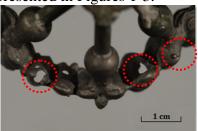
Structure of a circular bridge with casting defects in the form of blisters and misruns in the upper and side part of the substructure
